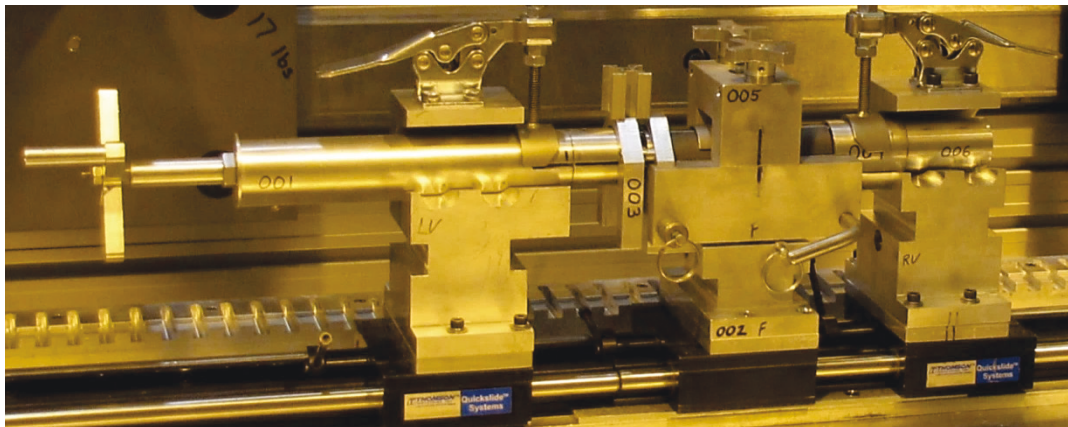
Rail-mounted left vise, support cradle, and right vise, plus several tools for capsule disassembly.
